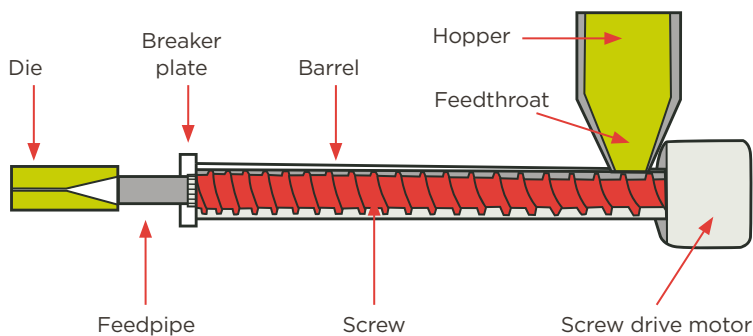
PLASTIC EXTRUSION PRESS KEY PARTS
